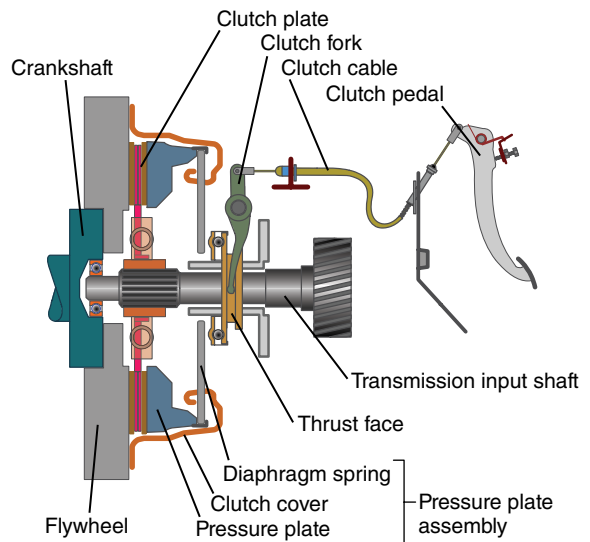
The crankshaft rotates the flywheel or flexplate, which sends power to the transmission.
